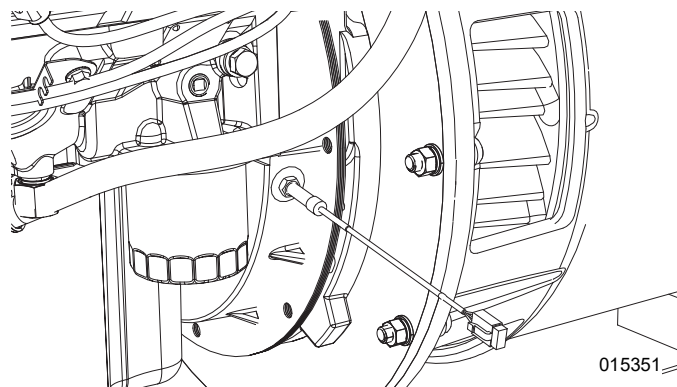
G9.0L Engine Flywheel Sensor (MPU1)
